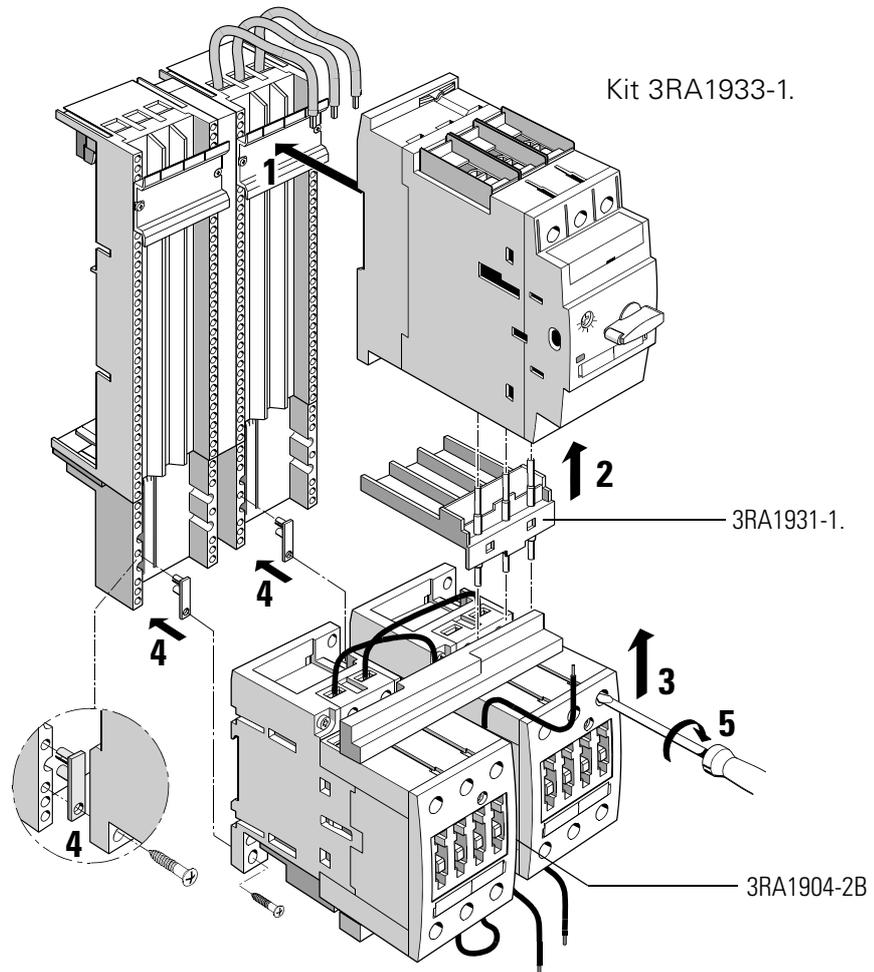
Self-assembly, busbars, reversing operation (frame size S2)
